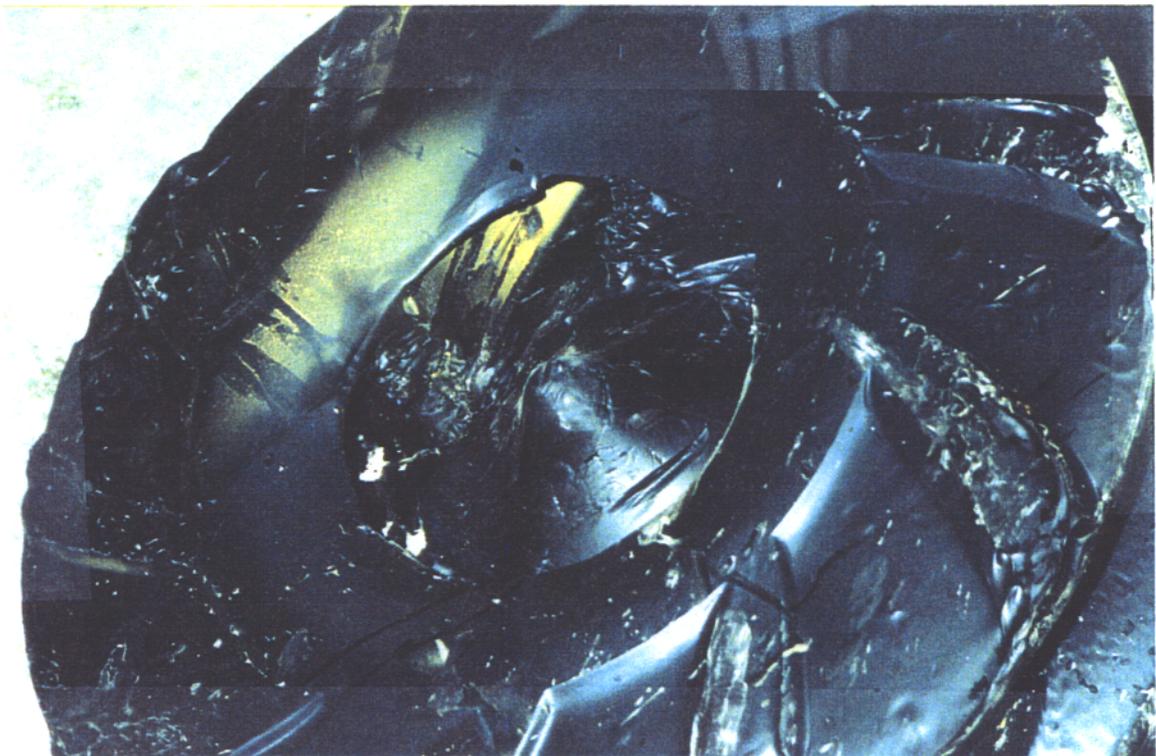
Gas Cooling Pump Impeller Damage
